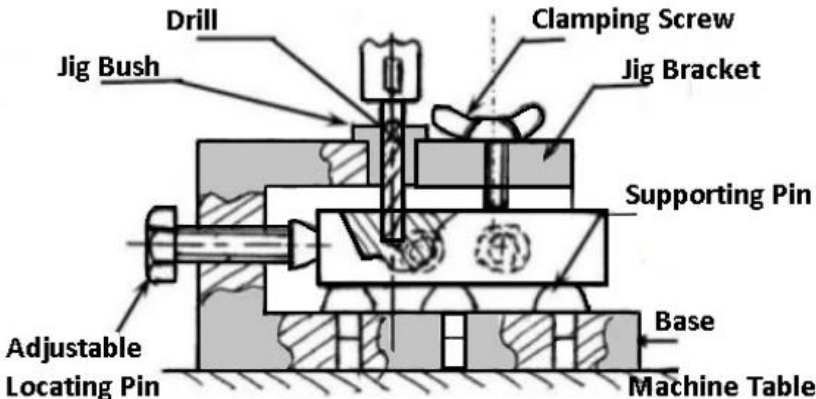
Elements in jig and fixture (Meduettaxila, 2012)
